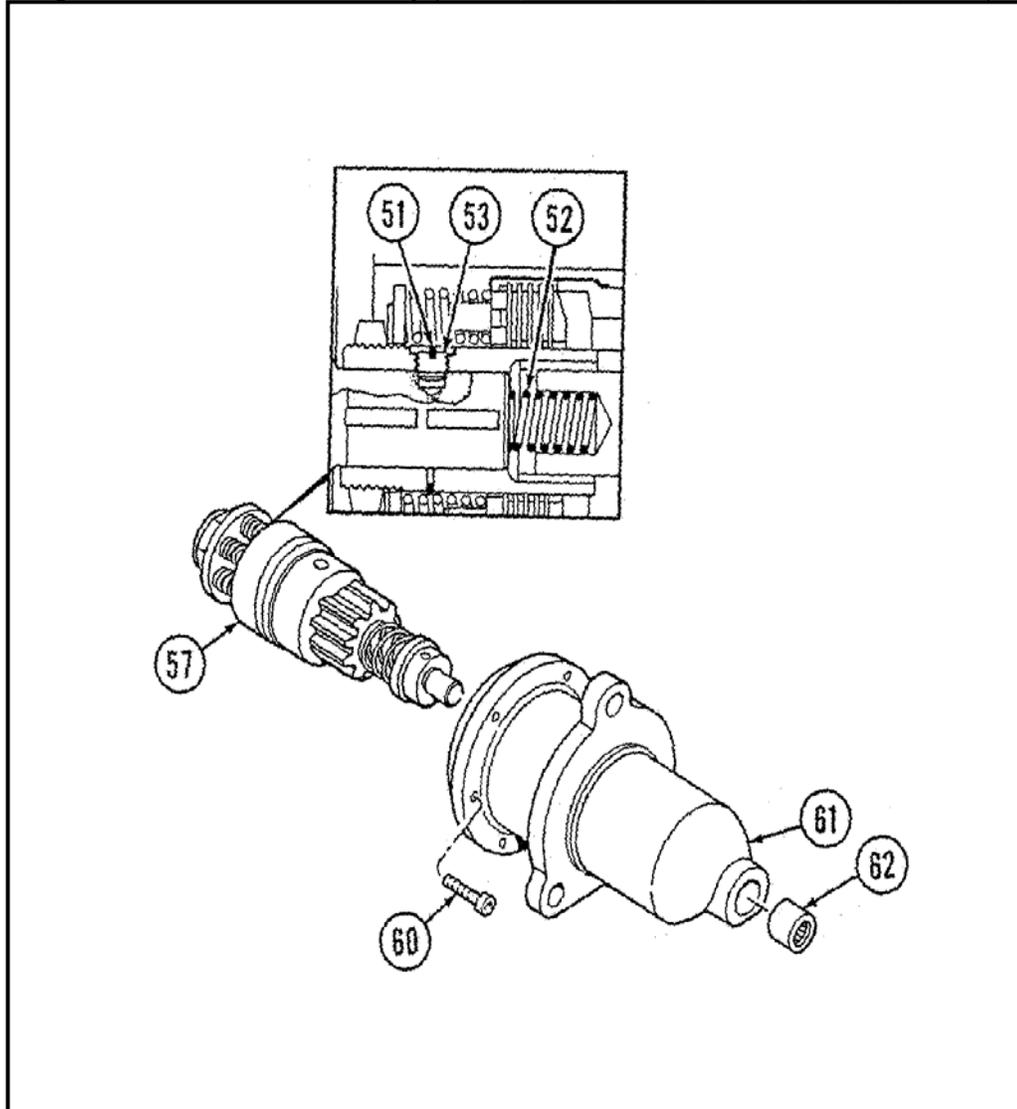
Gearbox Assembly (T112D/T121D LONG MESH)
